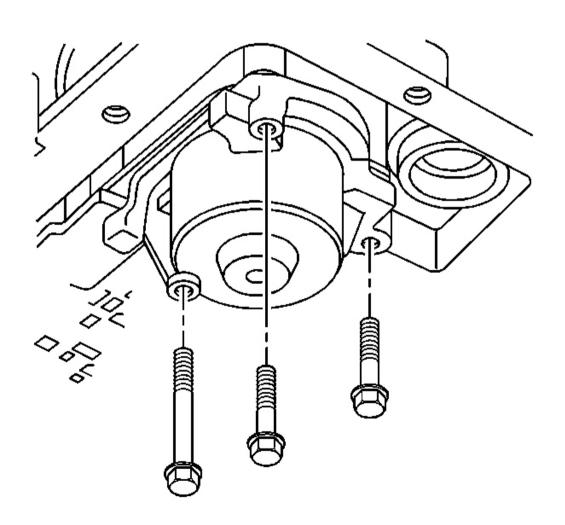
Removing The 1-2 Accumulator Cover Courtesy of GENERAL MOTORS CORP.
